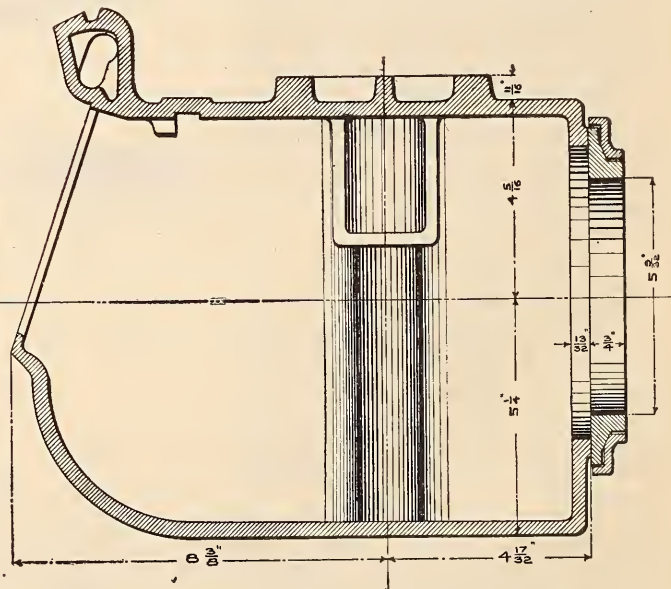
SECTIONAL VIEW, McCORD JOURNAL BOX.
